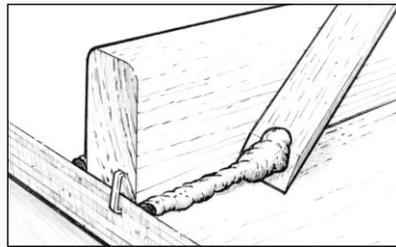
Remove or shape excess epoxy that squeezes out of the joint.
